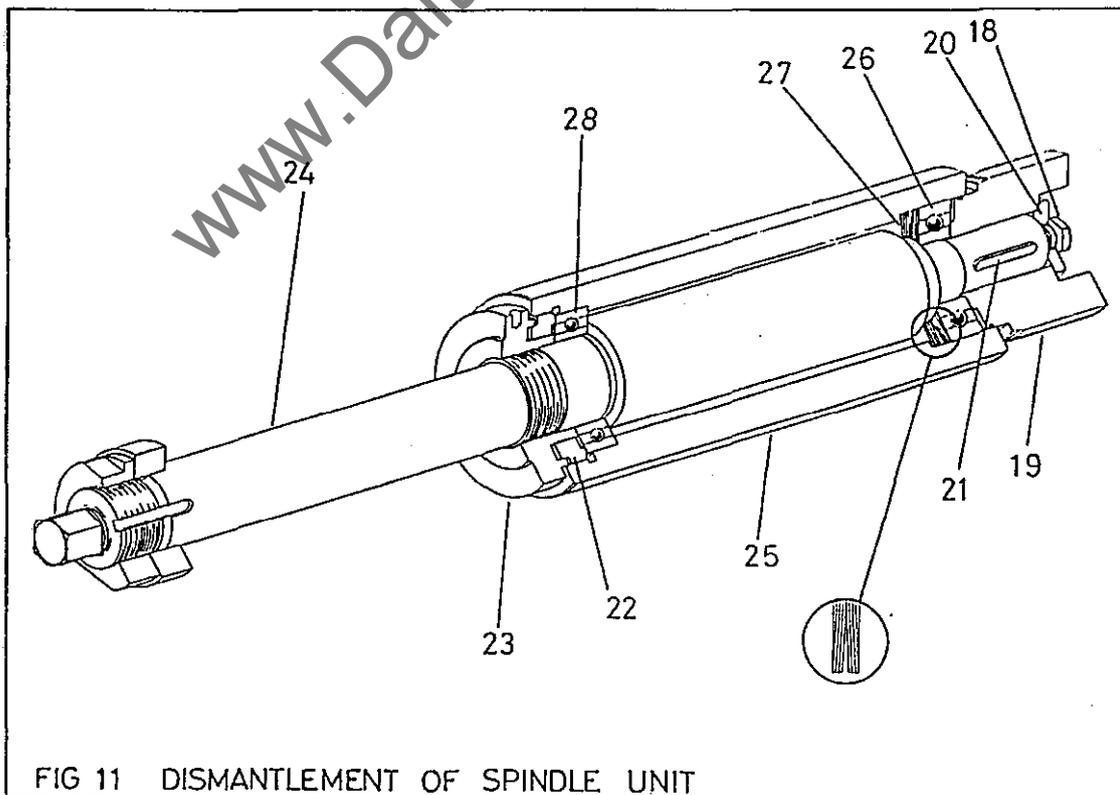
DISMANTLEMENT OF SPINDLE UNIT
